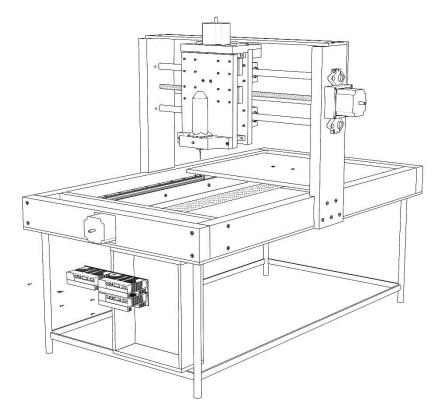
(MOUNTING THE MOTOR DRIVERS)
